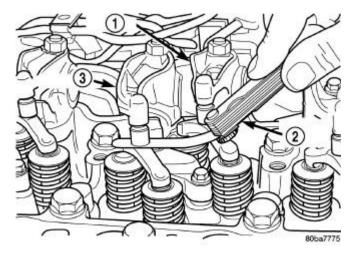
Measuring Valve Lash Courtesy of CHRYSLER GROUP, LLC
